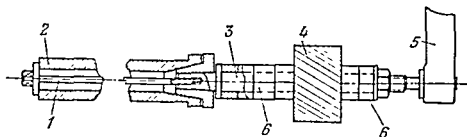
Holding an arbor-type cutter on a long arbor:
